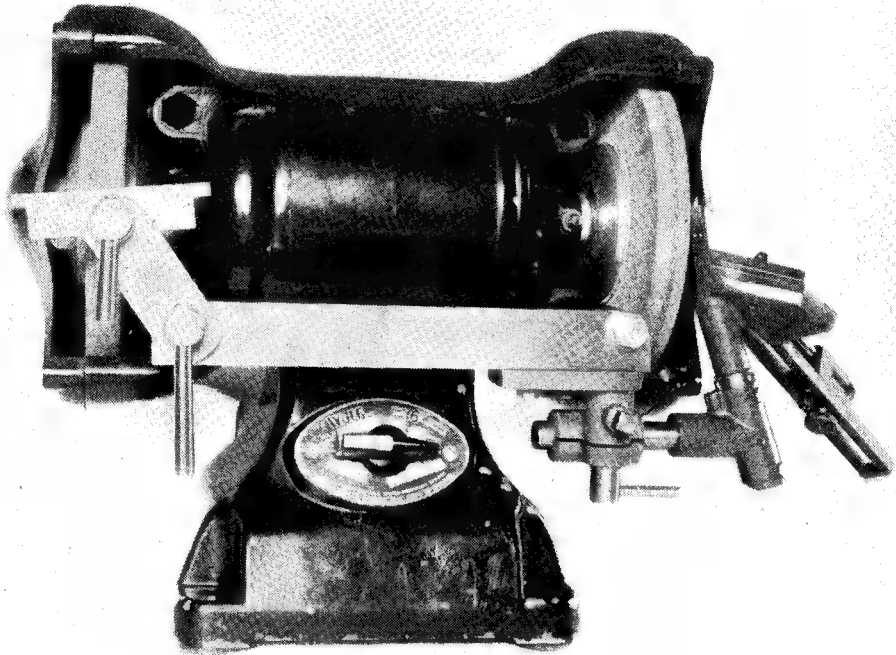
The grinding machine fitted with twist drill jig and angular grinding rest
